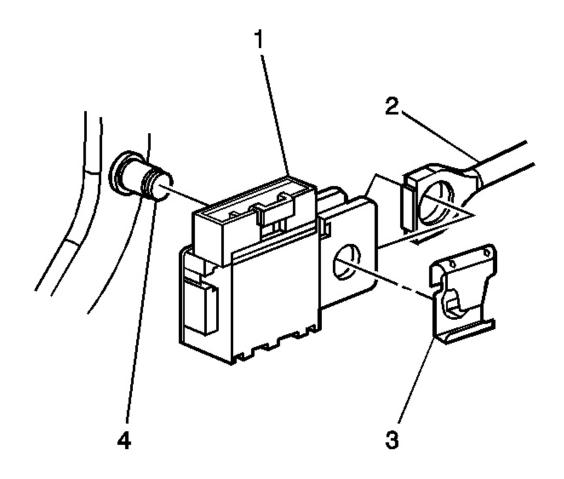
Identifying Brake Light Switch Components Courtesy of GENERAL MOTORS CORP.
